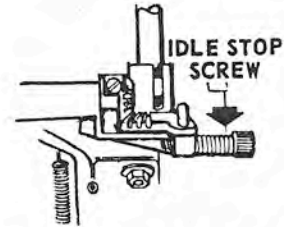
Idle speed stop screw used on late model QD and FD motors. Screw is on port side of motor.
